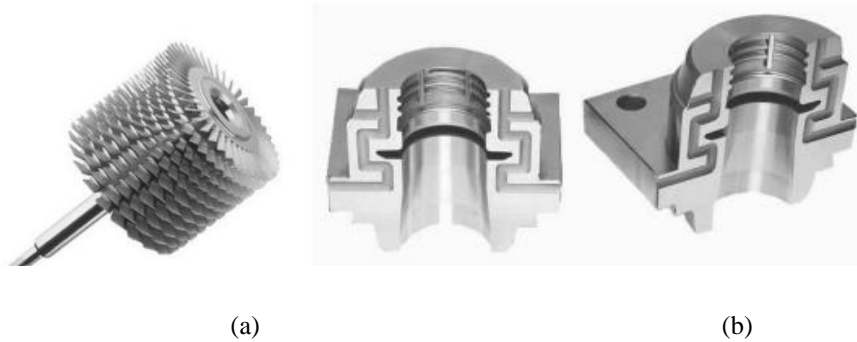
Examples of EDM die-sinking finished parts: (a) High Speed Turbine; (b) Screw thread mold of the PET bottles. (Schaller et al., 2006)
